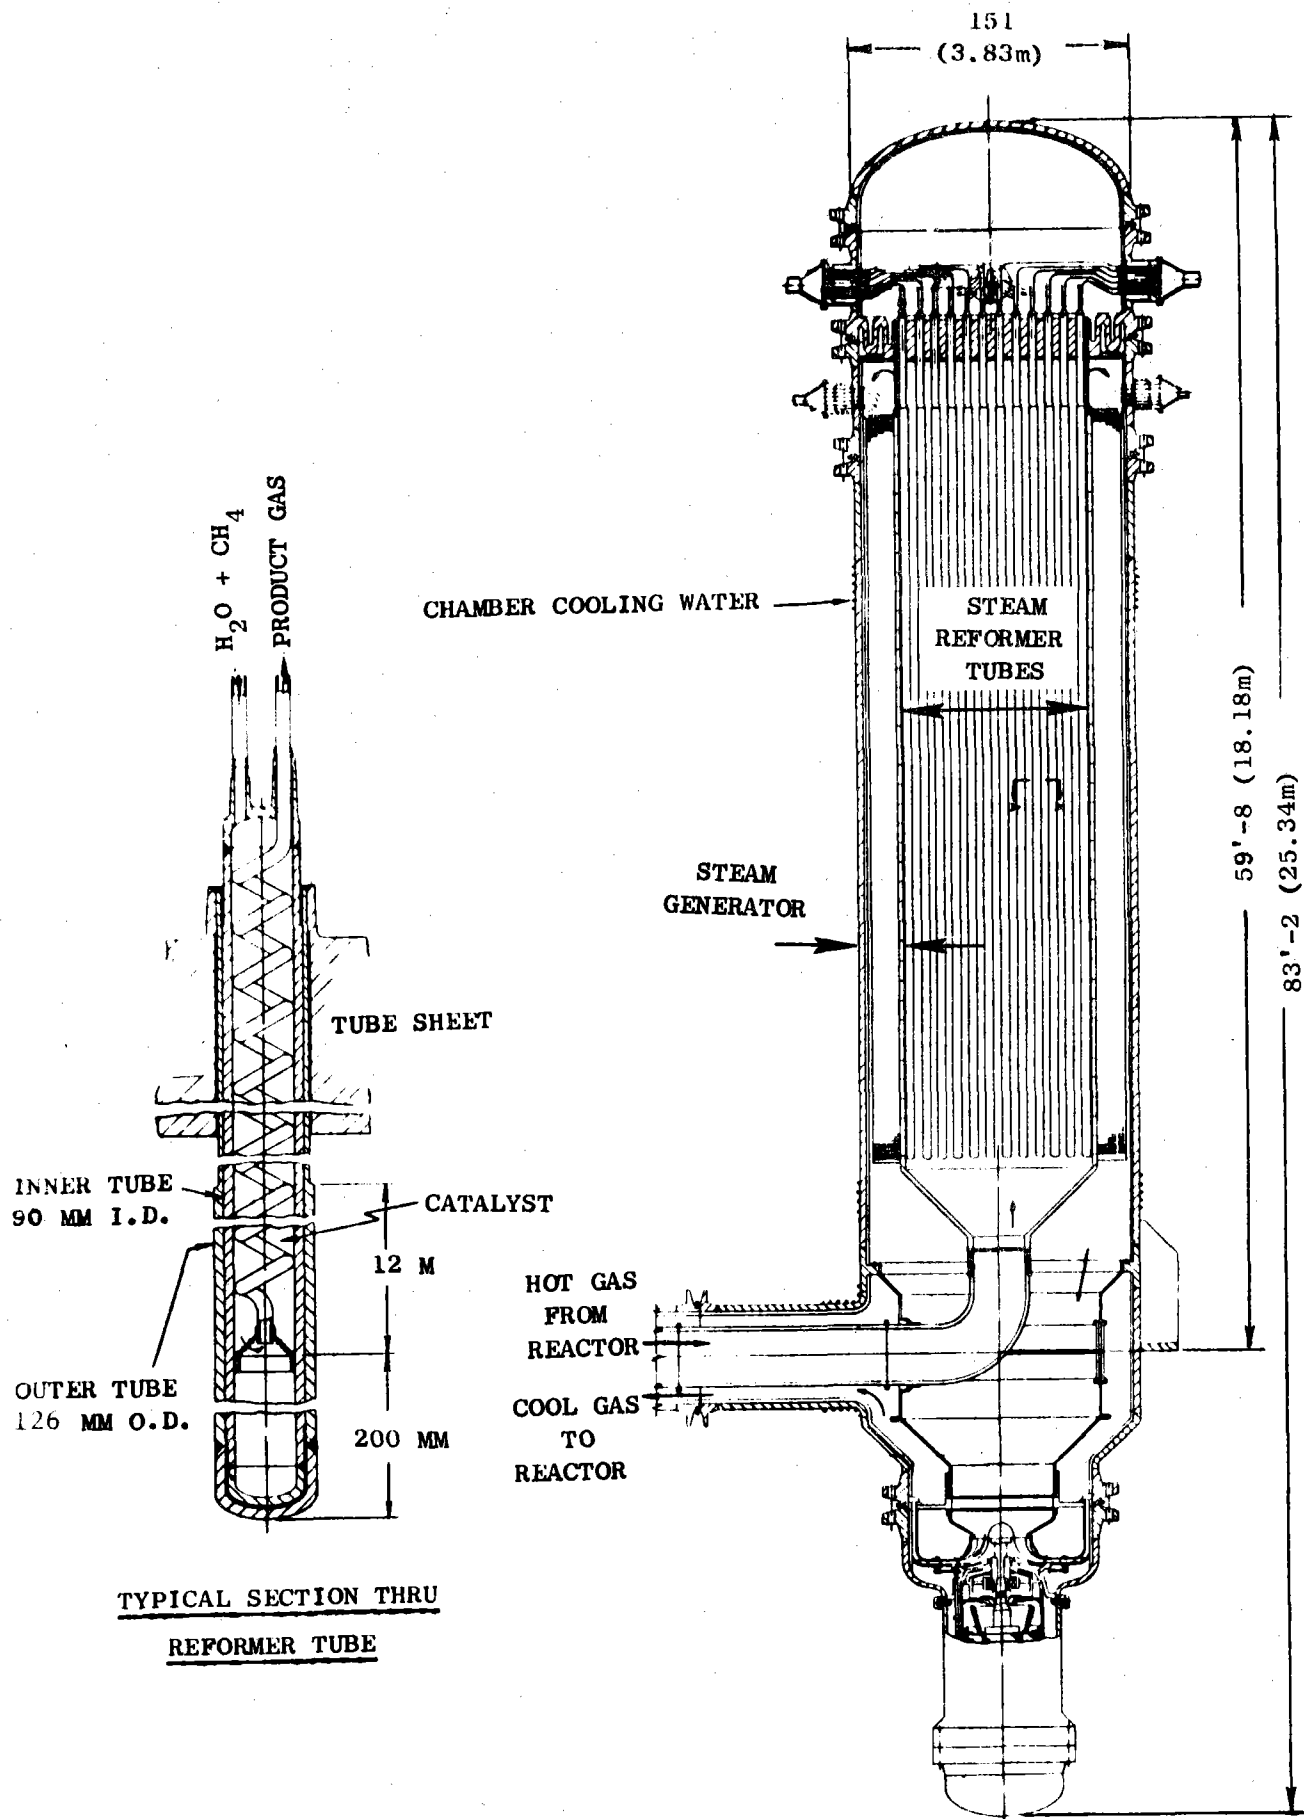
Reference Design for the Duplex Tube Steam Reformer/Steam Generator Assembly.
